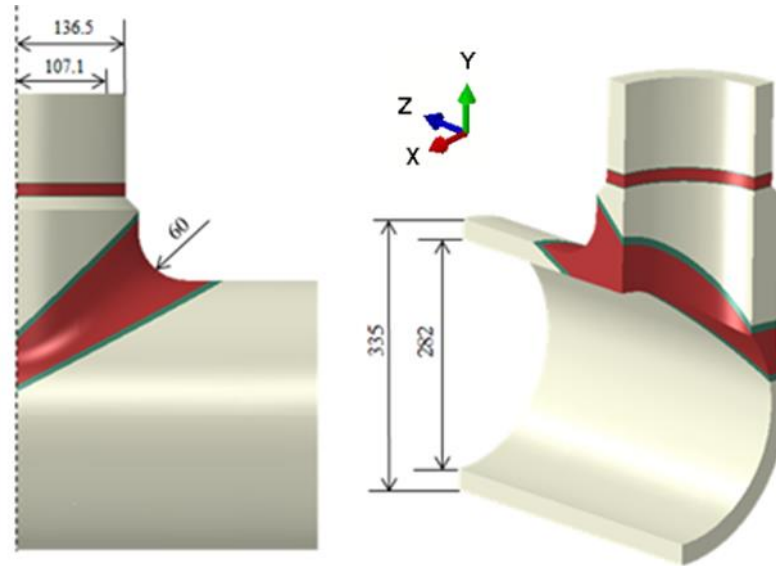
3D weldolet model with key dimensions (in mm) [5], [117].
